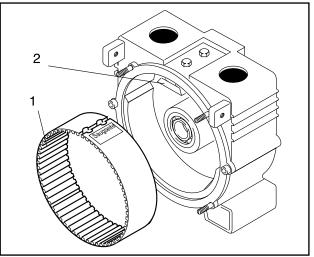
Installation of separating part 1 Separating part 2 Holder for separating part
